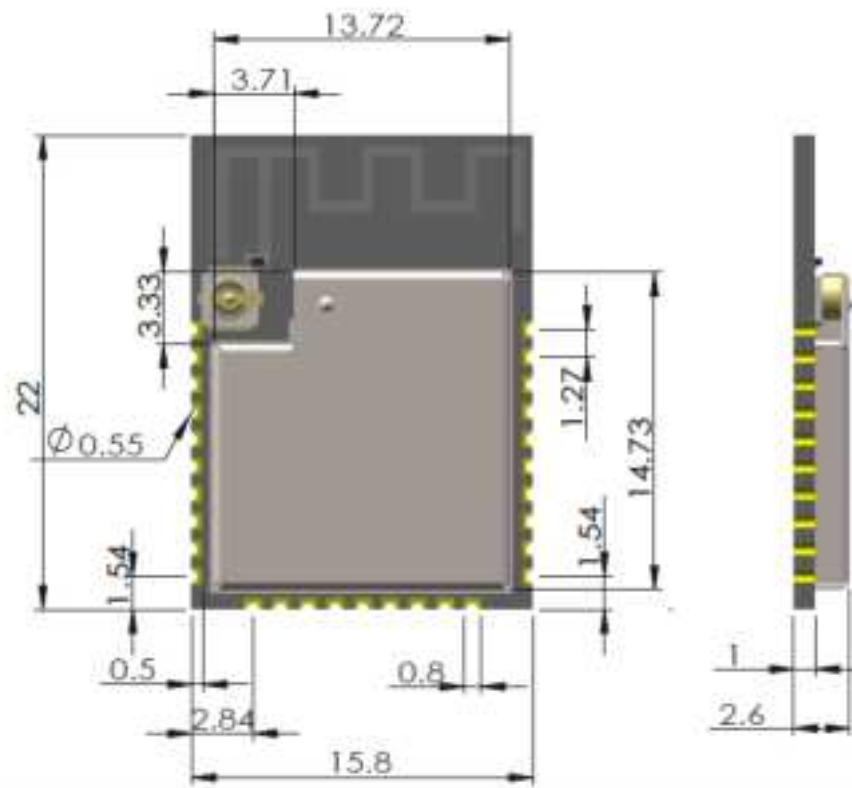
Module dimensions of HM-MT2401 with shield cover
